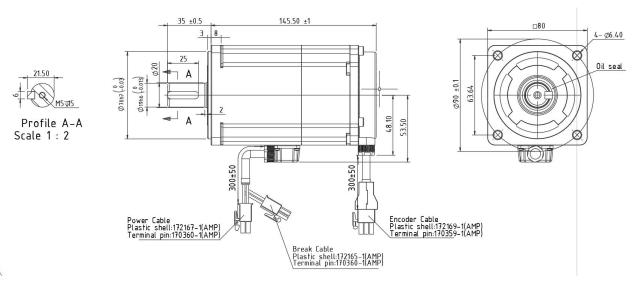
Installation dimension drawing of WD series 80 flange servo motor
